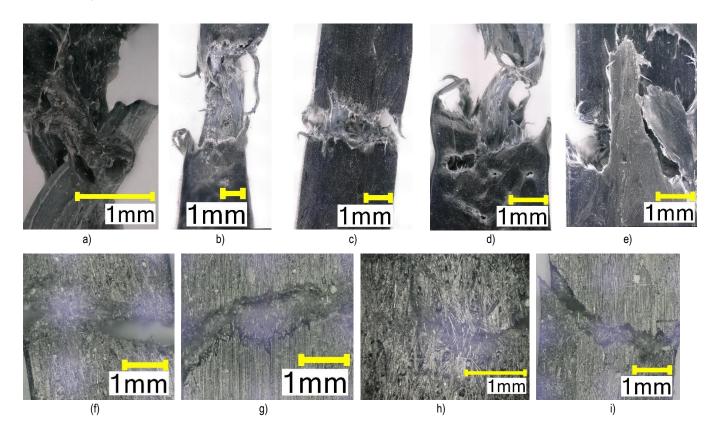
Failure locations of specimens after the tensile test: a) rHDPE; b) B40; c) B60; d) B80; e) B100; f) A40; g) A60; h) A80; i) A100
